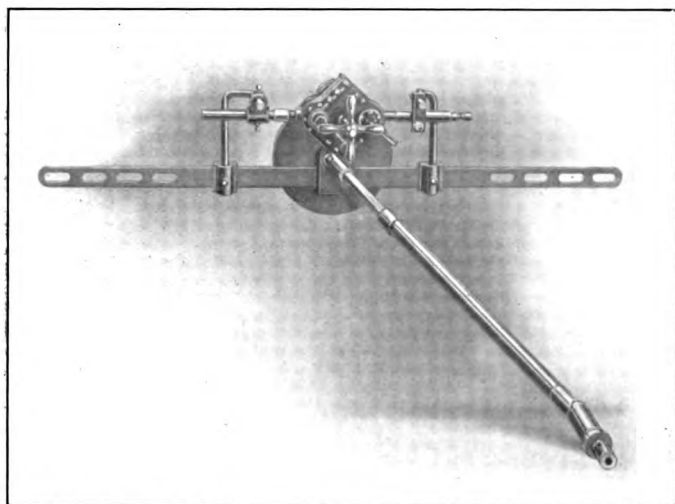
The Faessler Tube-Cutting Machine with Motor.
